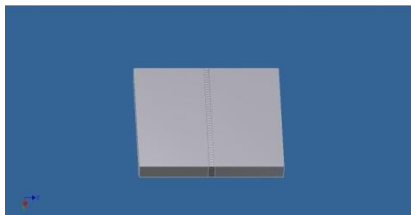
Modelling of butt joint weld plates (Eg: aluminum, mild steel and cast iron)
